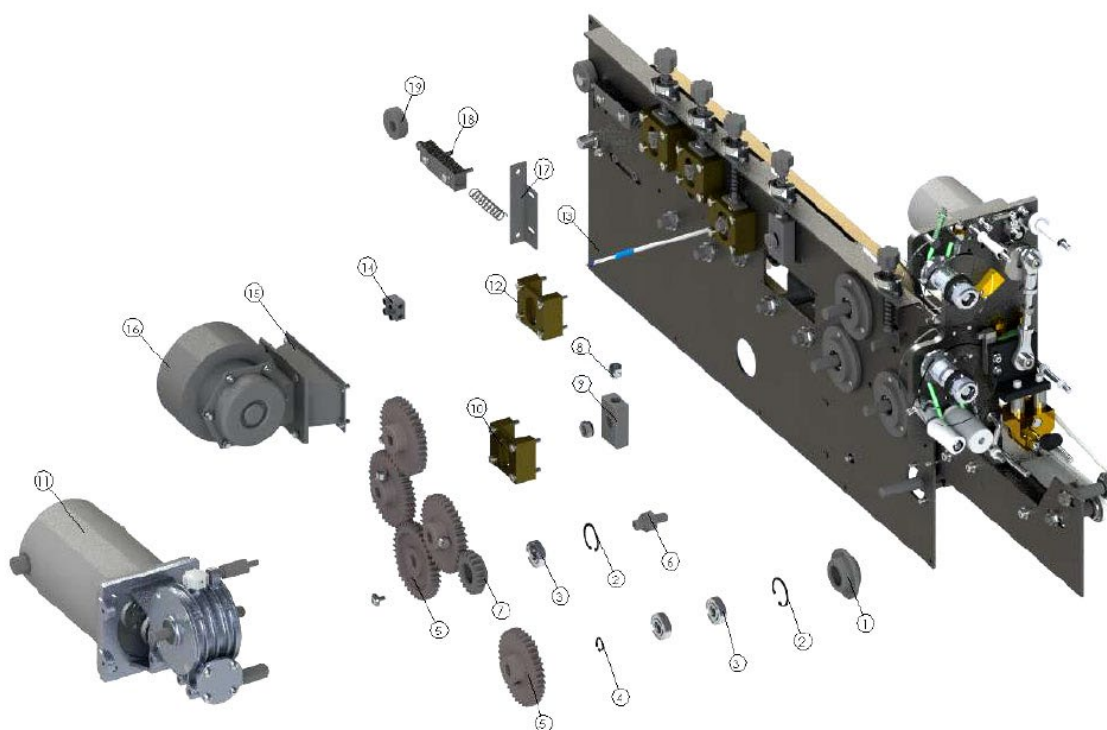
FRS-1120W Motor and Gears Parts Diagram
